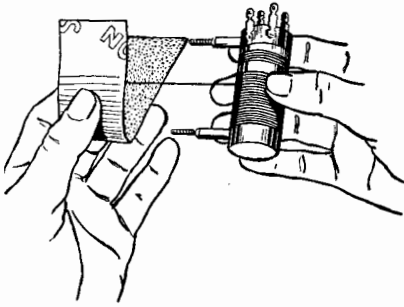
Using small piece of sandpaper to remove enamel insulation from coil wire
